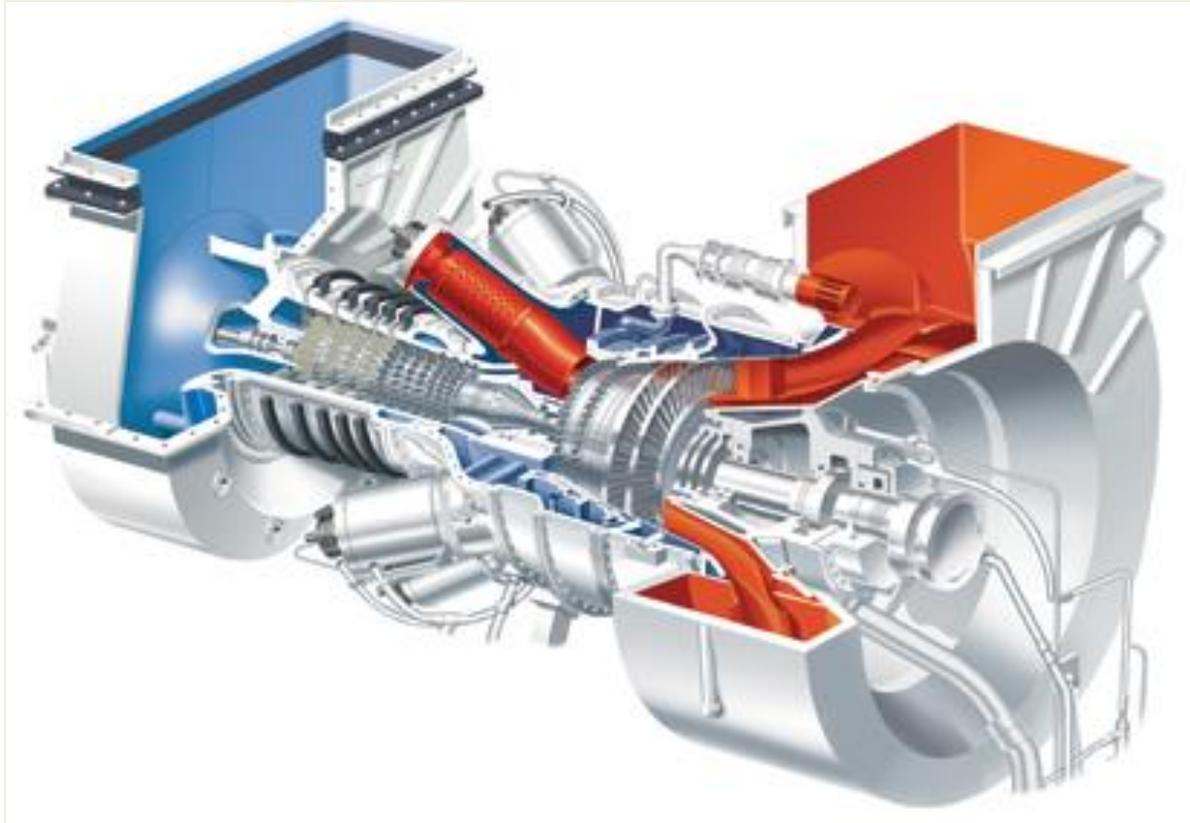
Centrax CX400 Axial Gas Turbine (With Axial Compressor)[29]
